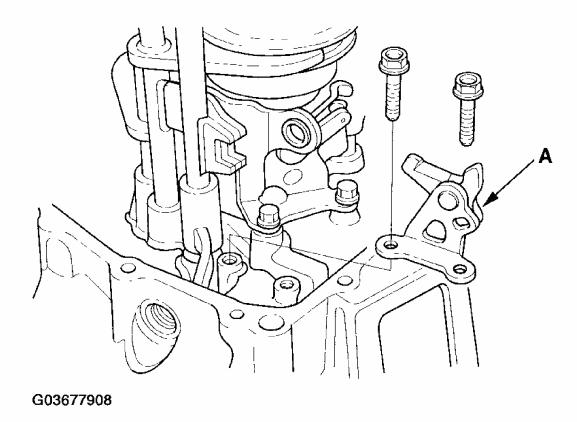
Removing Reverse Lock Cam Courtesy of AMERICAN HONDA MOTOR CO., INC.
